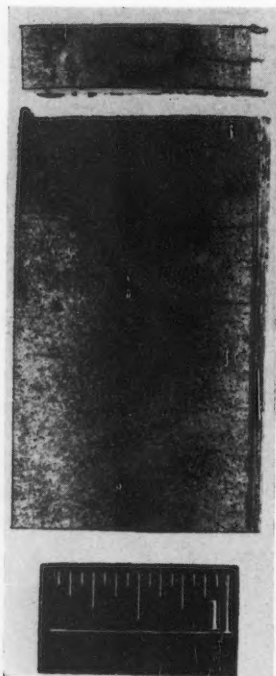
Section of failed tube showing OD cracks penetrating tube wall.
